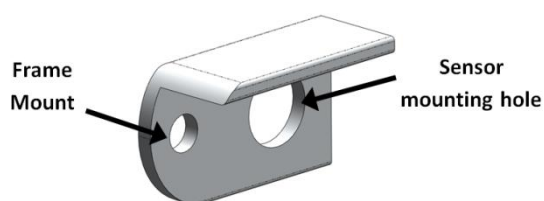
The mounting bracket for the rear wheel speed sensor.
